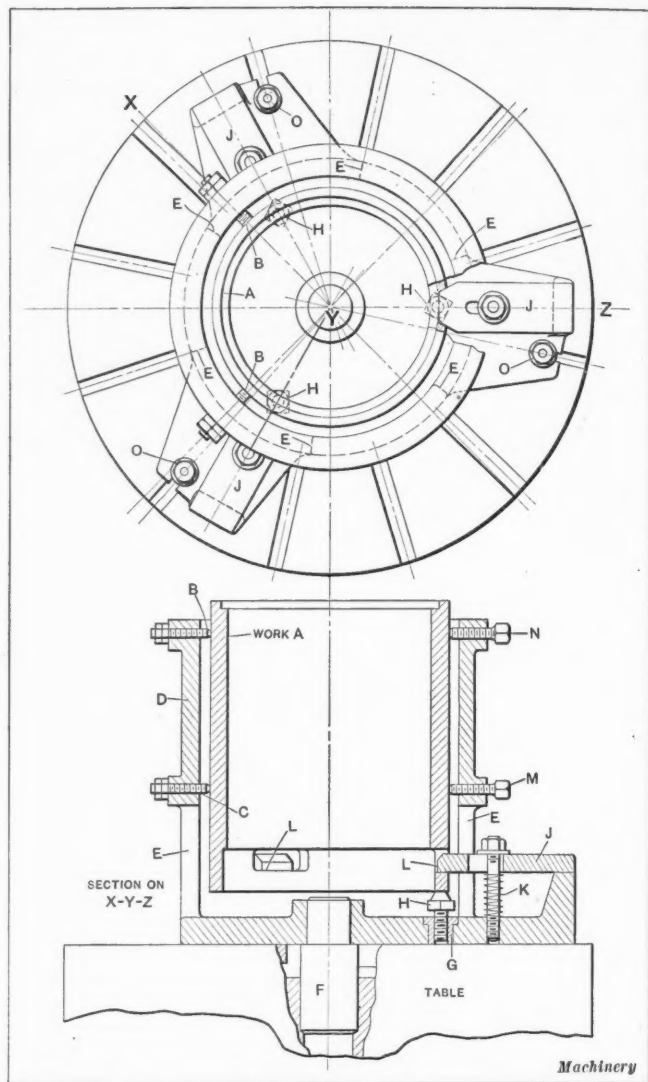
Fixture for holding Casting *A* which is to be finished by a Single Operation
